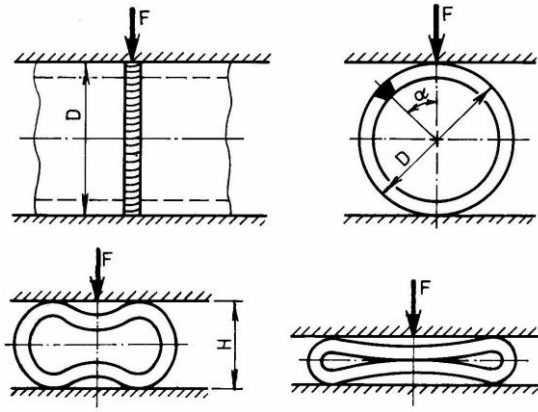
The flattening test of the section-type specimens of welded coiled tubing. The principle of the method
